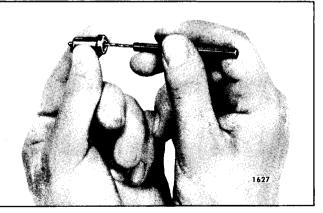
Cleaning Injector Spray Tip using Tool J 1243
